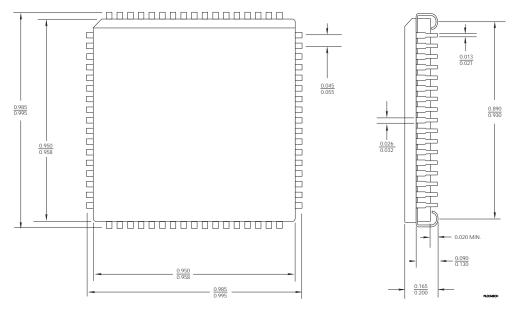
68 Pin PLCC Package Mechanical Dimensions
